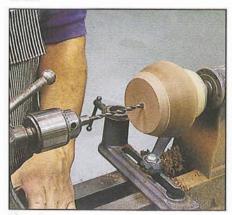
Photo L Mount a drill chuck on the lathe tailstock, and drill a $\frac{1}{4}$ " hole $\frac{5}{16}$ " deep into the lid for the knob's tenon.
